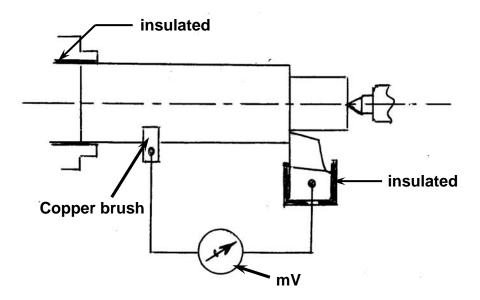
Tool-work thermocouple technique of measuring cutting temperature.
